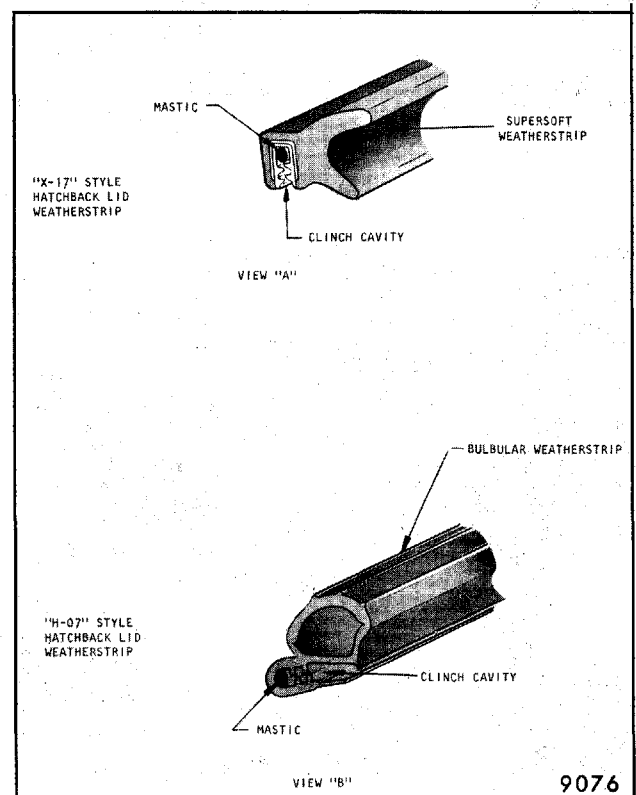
"H-07" and "X-17" Weatherstrip
